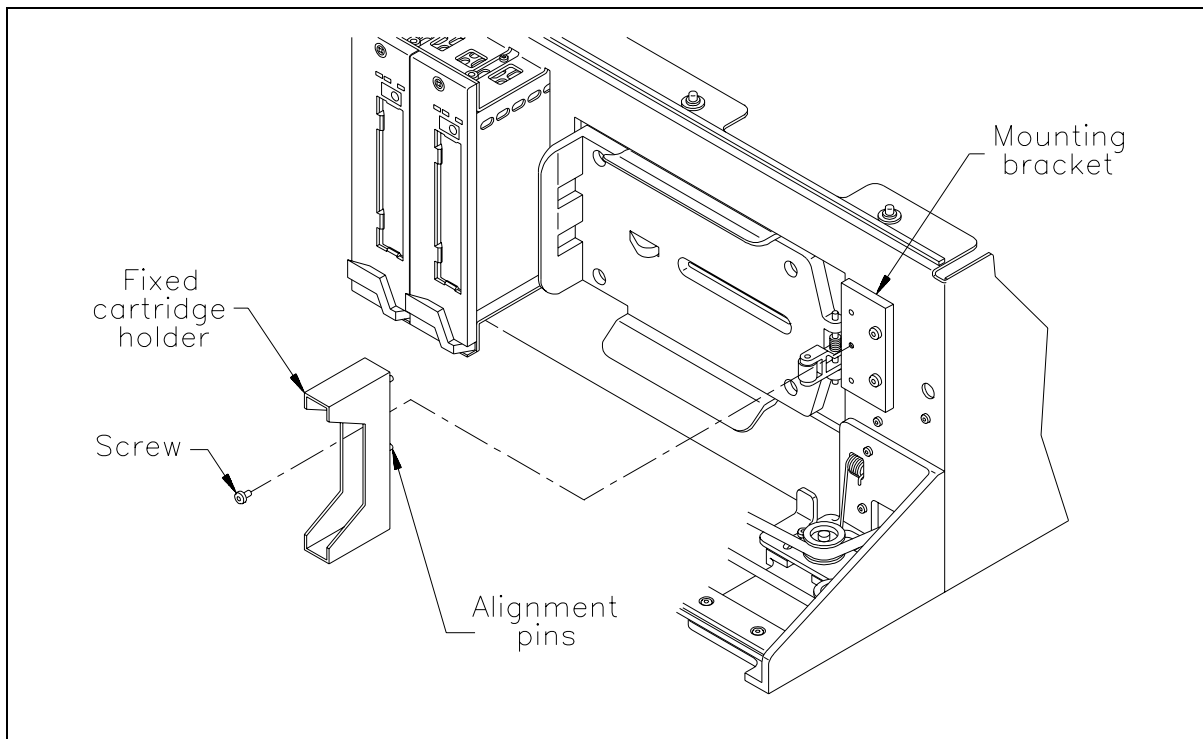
EXB-210: Removing the fixed cartridge holder
